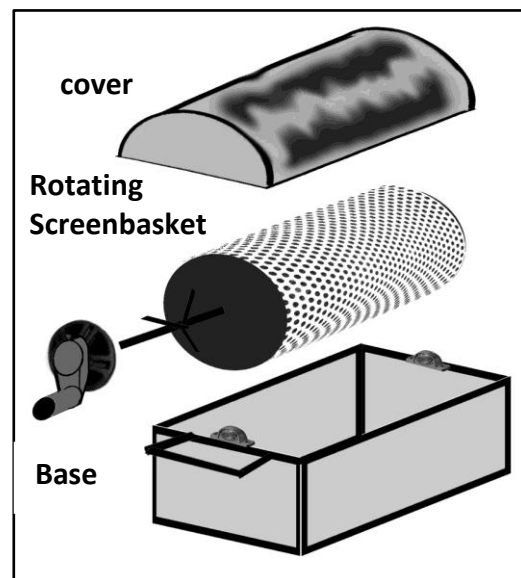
Isometric View of the Cacao Mechanical Dryer with Major Assembly Parts
